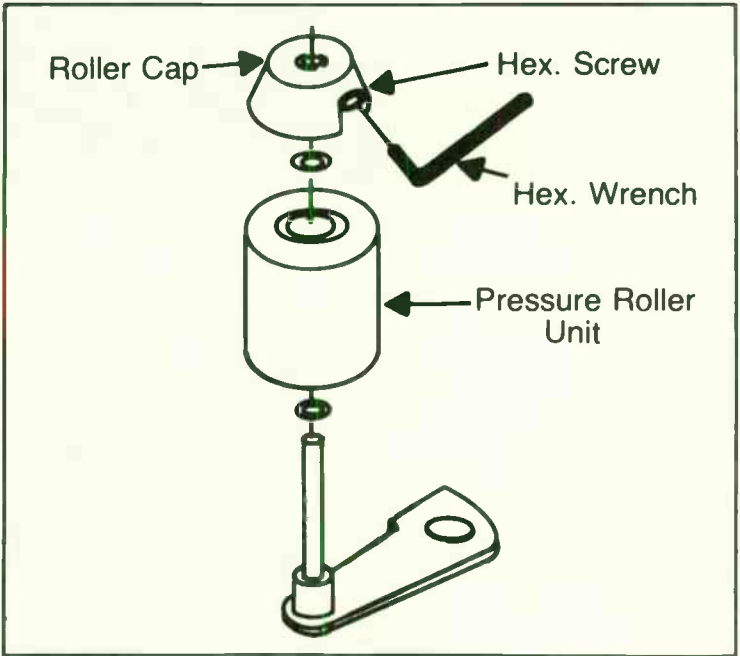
Pressure roller replacement (courtesy of Magnavox).
